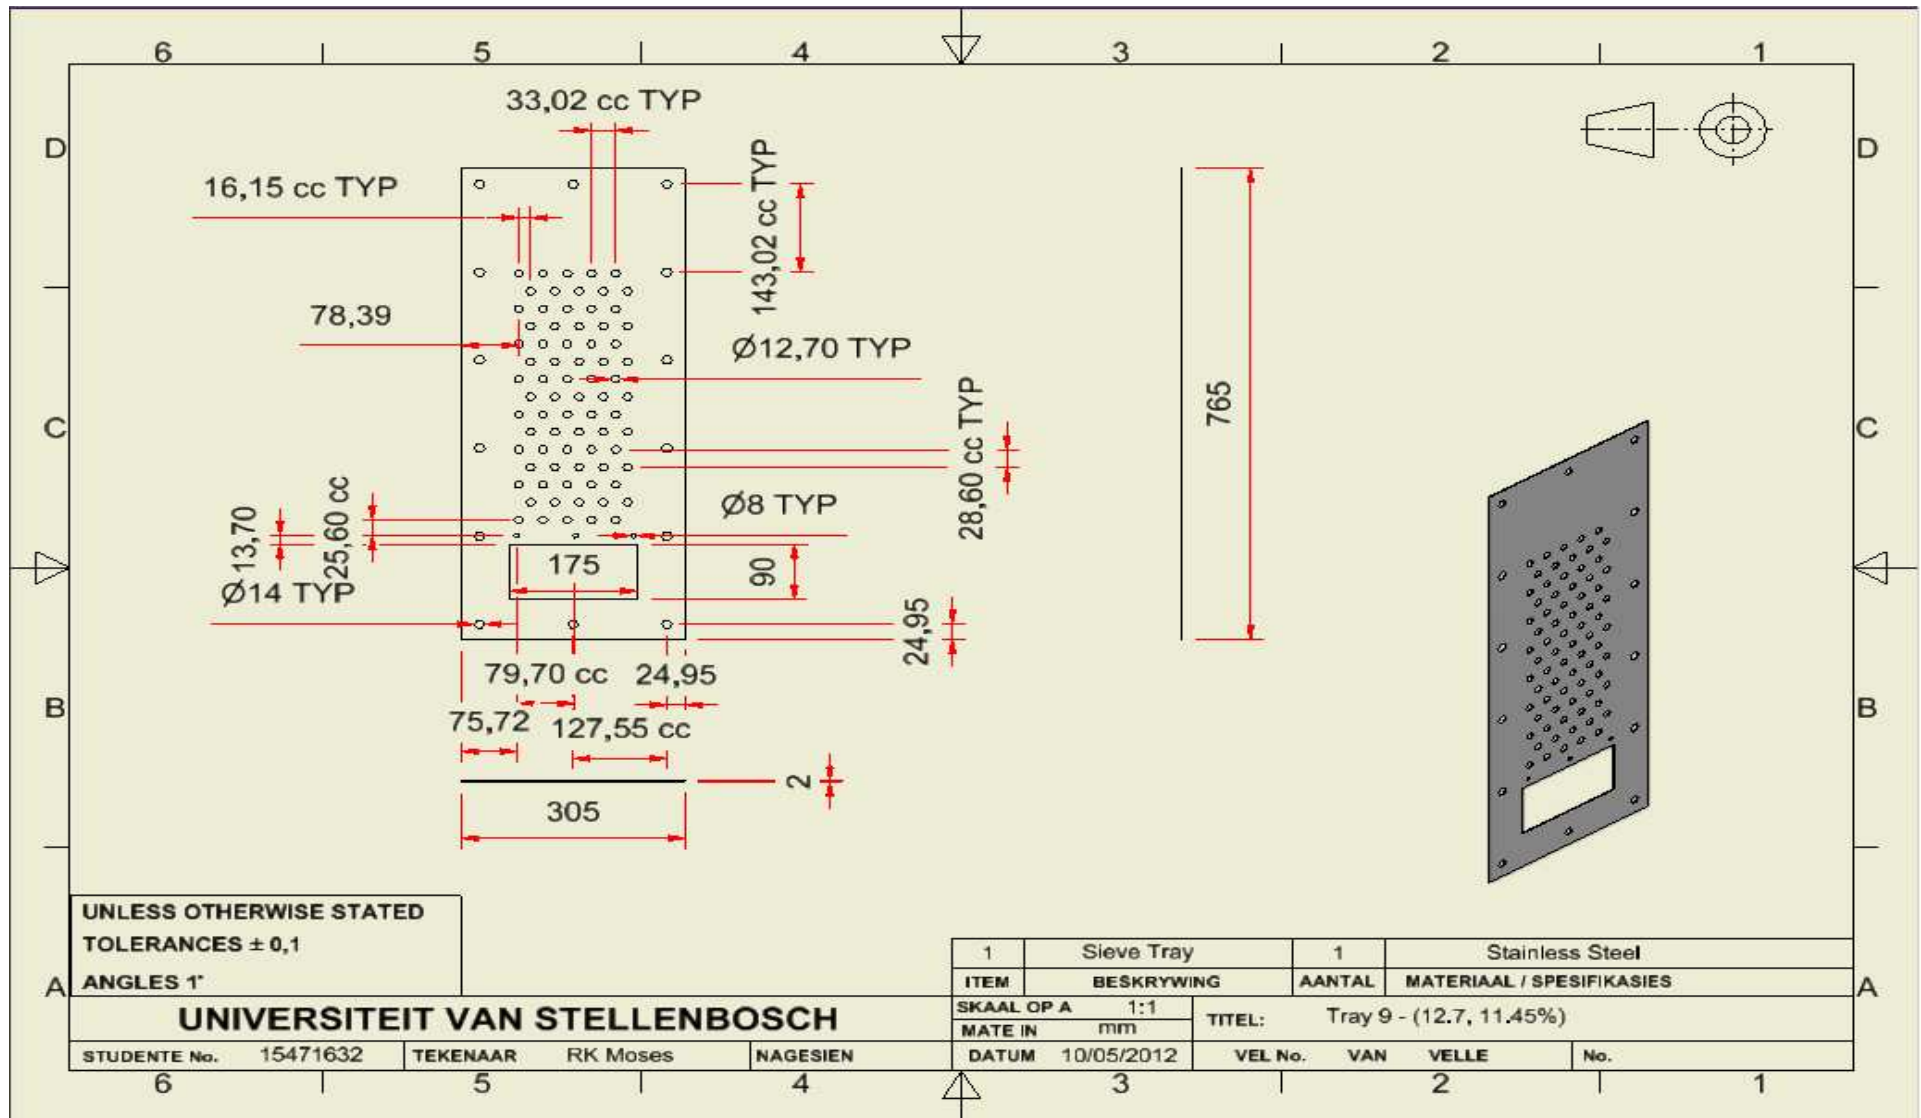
Tray 9 with ½ in. (12.7 mm) hole diameter and a fractional hole area of 11.5%
